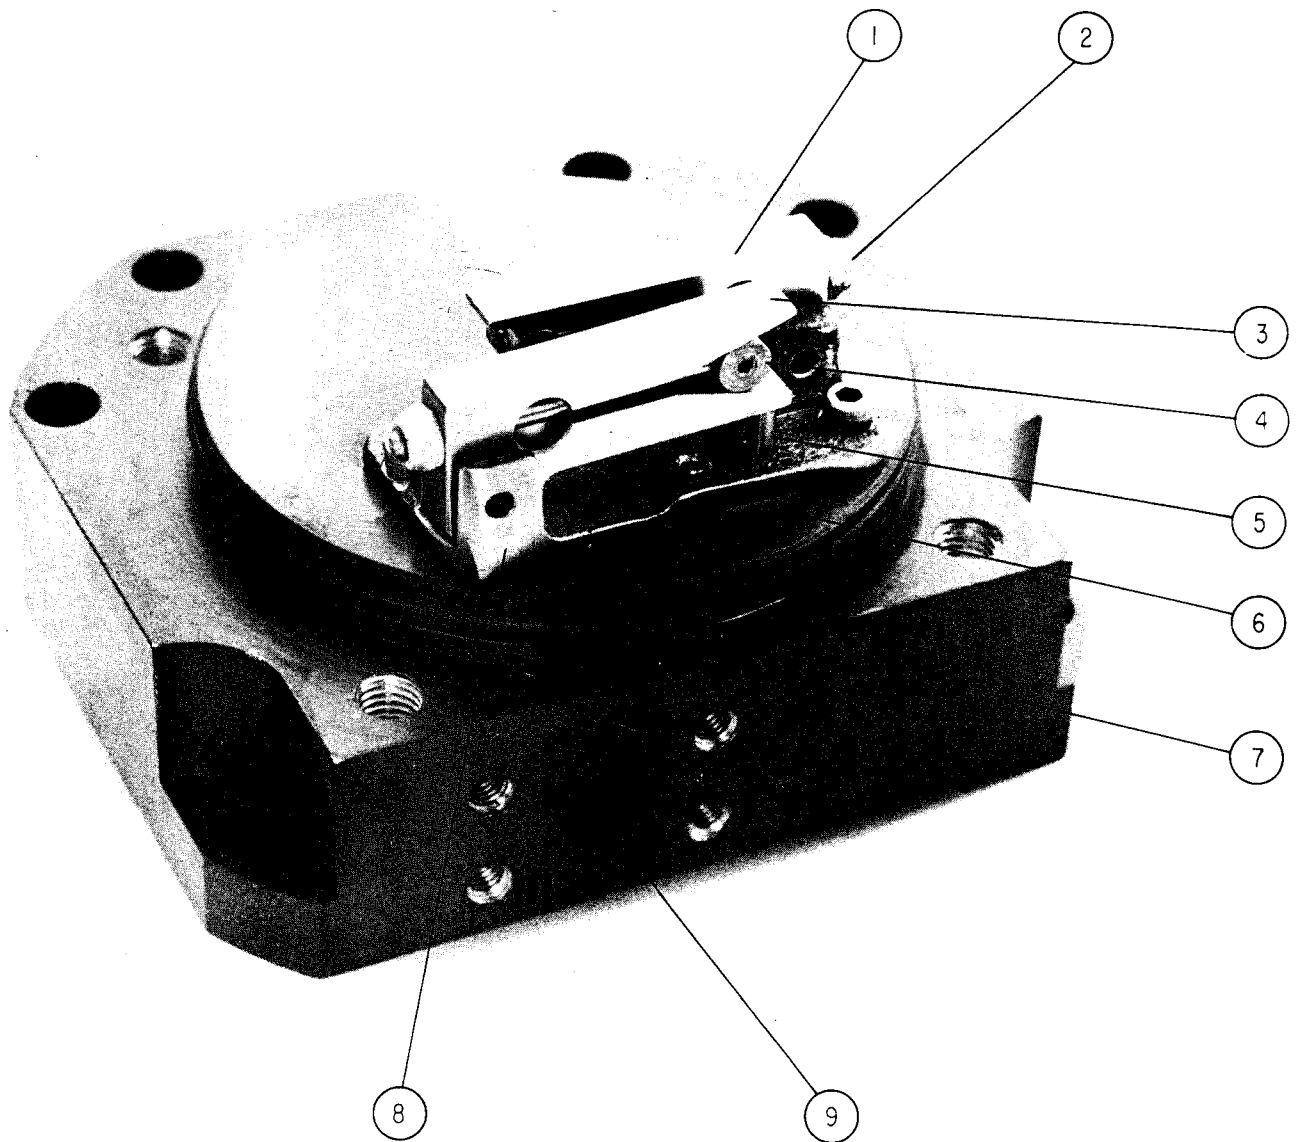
VALVE-PLATE ASSEMBLY
